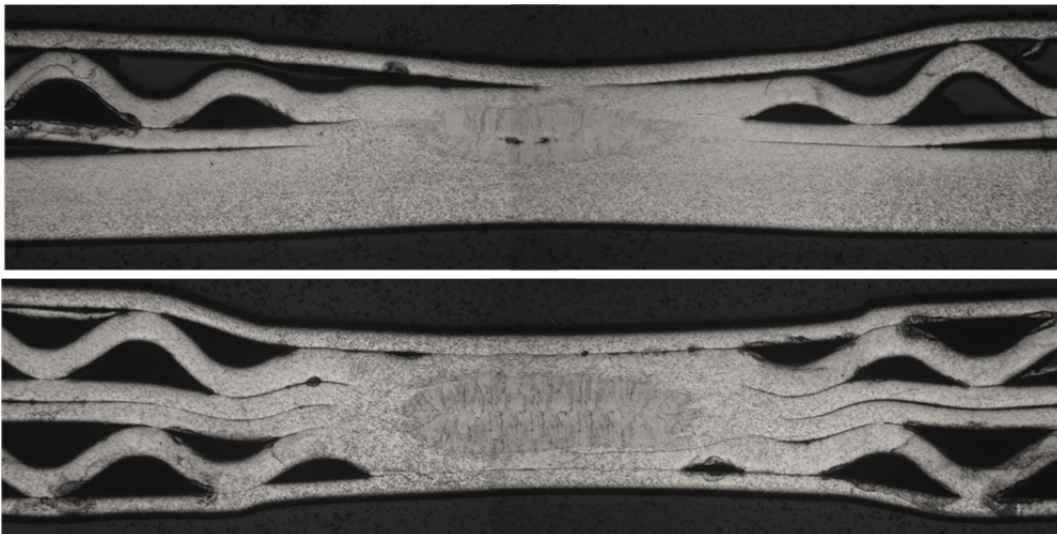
Dissimilar (above) and similar (below) resistance spot welding of the sandwich.
